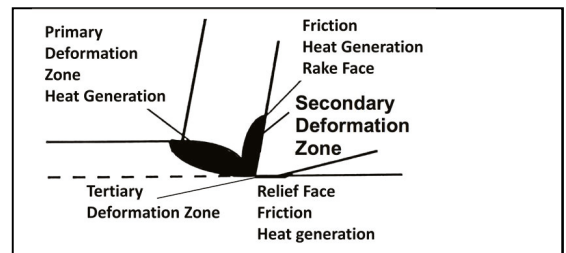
Heat generation zones at the tool-workpiece and tool-chip interfaces.
